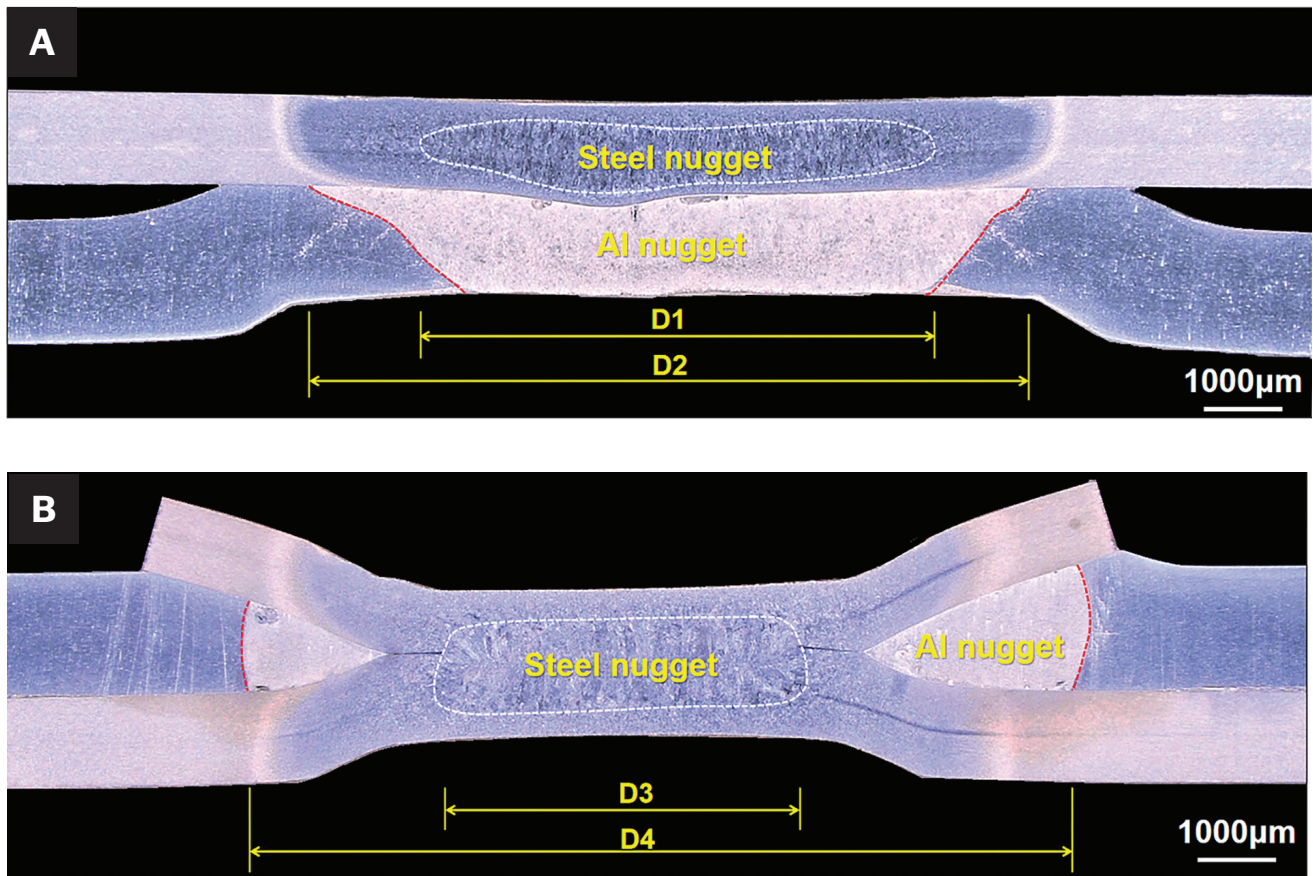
Cross-section views of the joint after the welding stage: A — RSW; B — AE-RSW.
